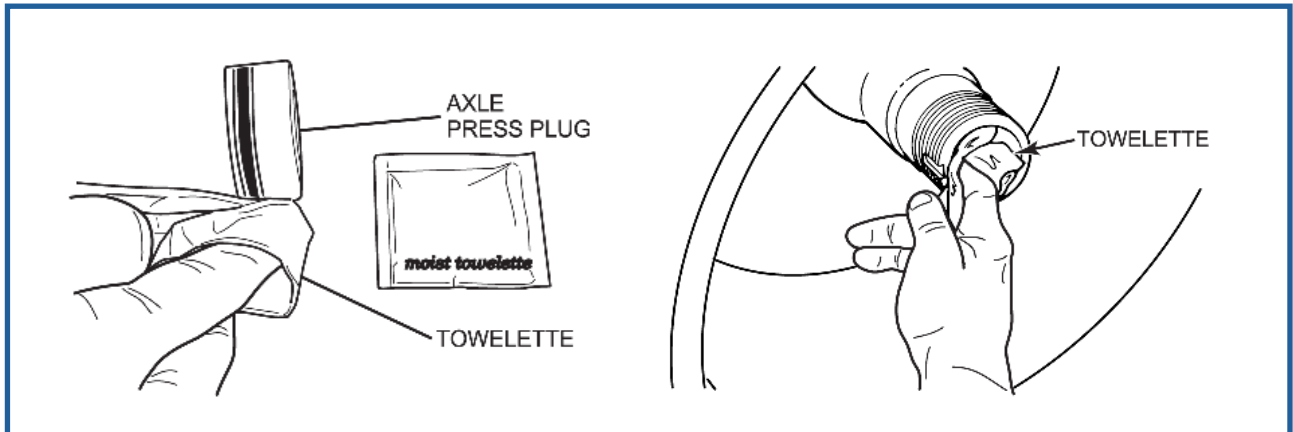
Cleaning Axle Press Plug and Spindle Bore
